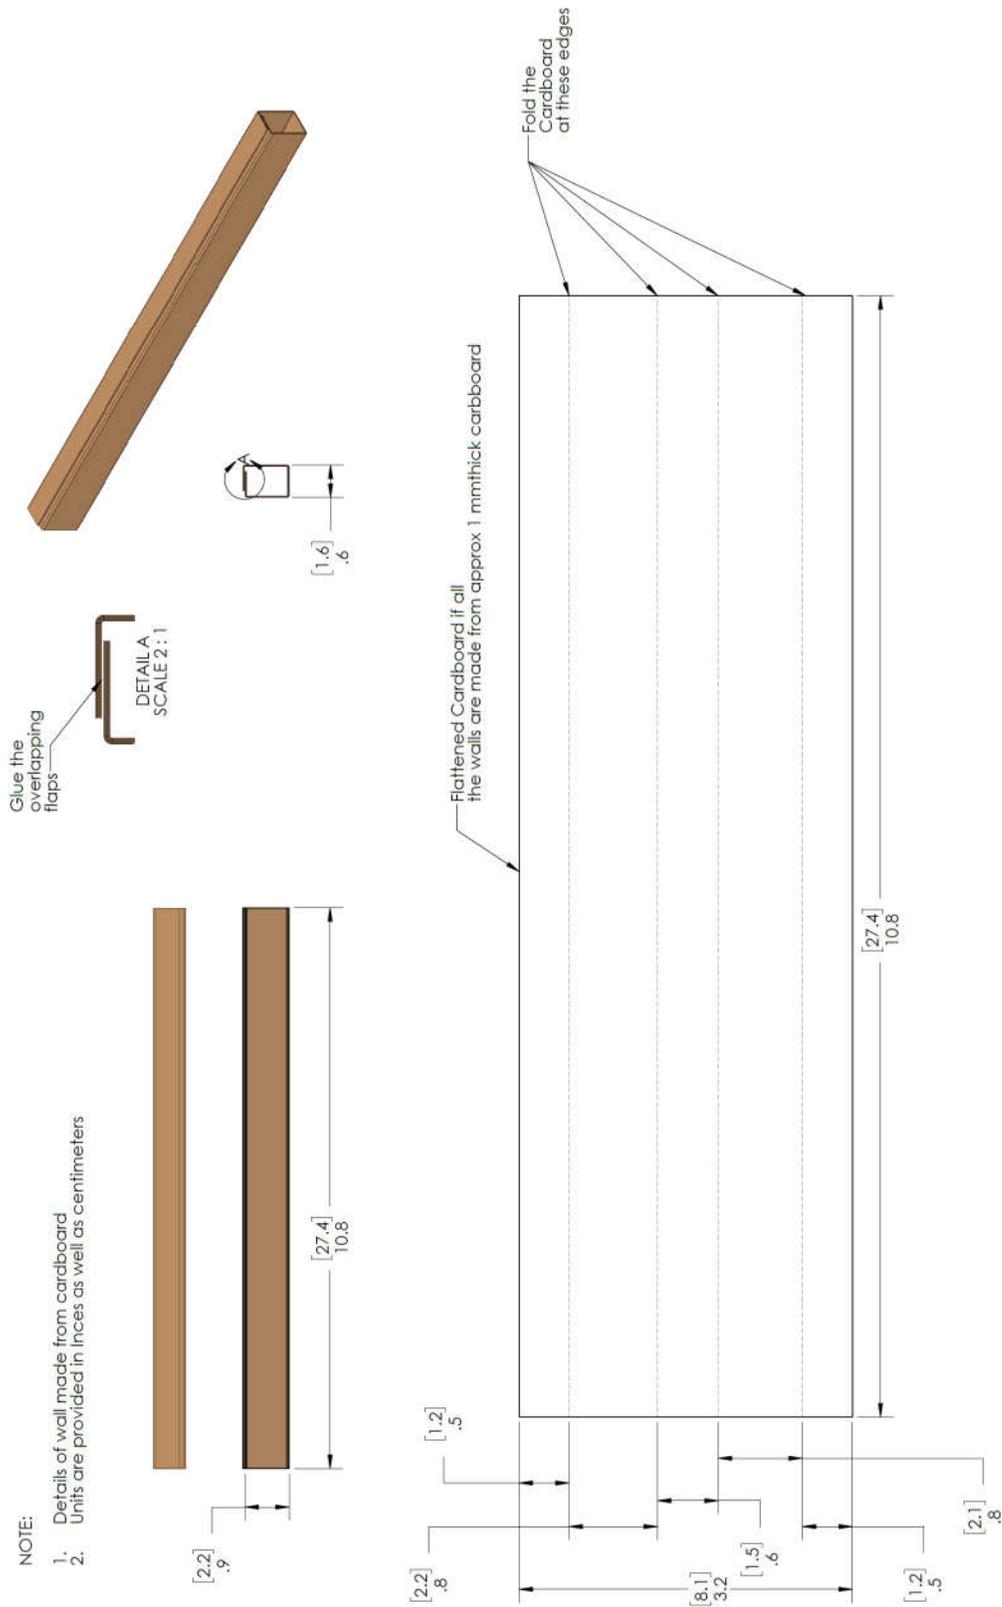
Scheme for building fixed walls and sliding gates using cardboard, in case participant doesn't have enough LEGO bricks
